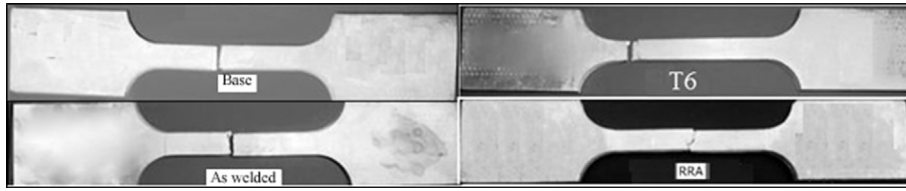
Fracture locations of tensile samples of welds in different temper conditions.
